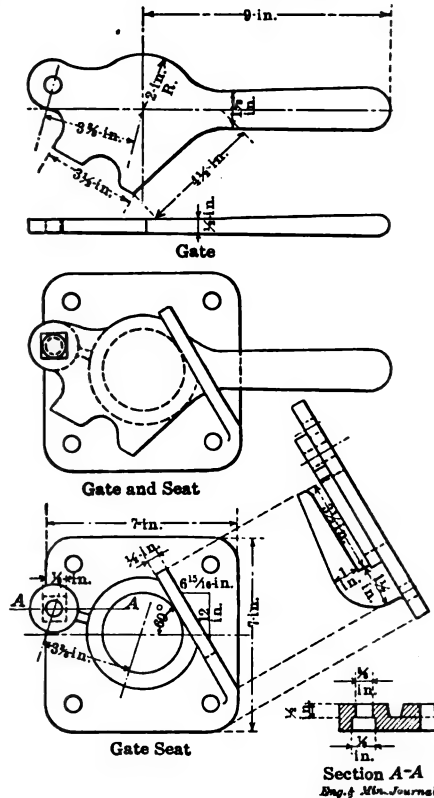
TAILING GATE USED ON JOPLIN JIGS.
